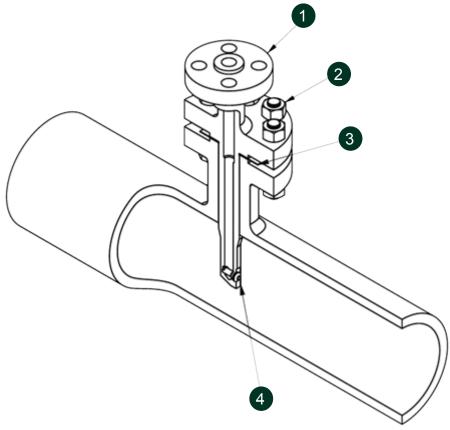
Nozzle Housing Assembly (DSH-2XX)
